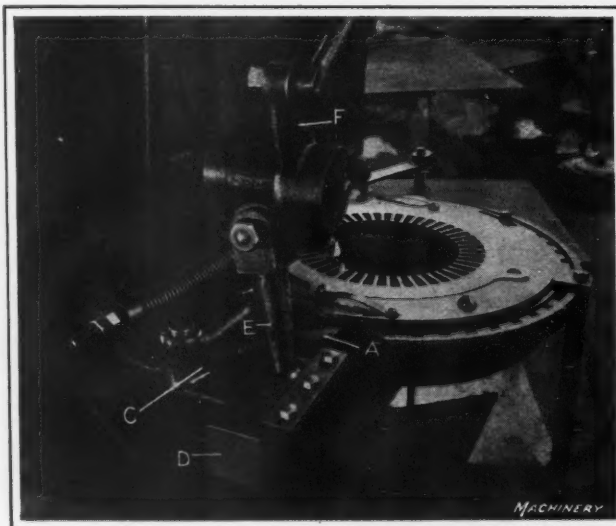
Toledo Power Press with Automatic Indexing Mechanism attached and with Stator Stamping located in the Fixture
